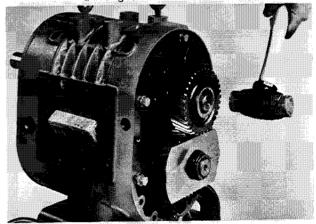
STARTING DRIVE GEAR ONTO SHAFT WITH SOFT FACED MALLET
